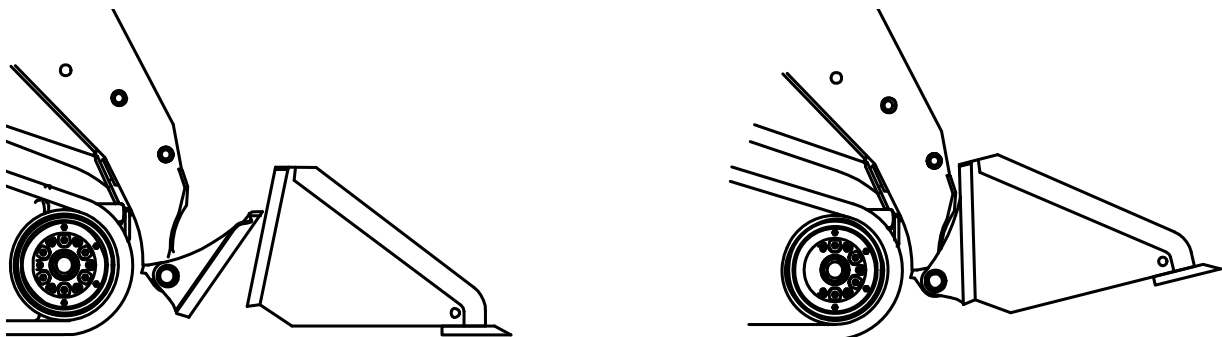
Quick Attach Mechanism Locked to Attachment
